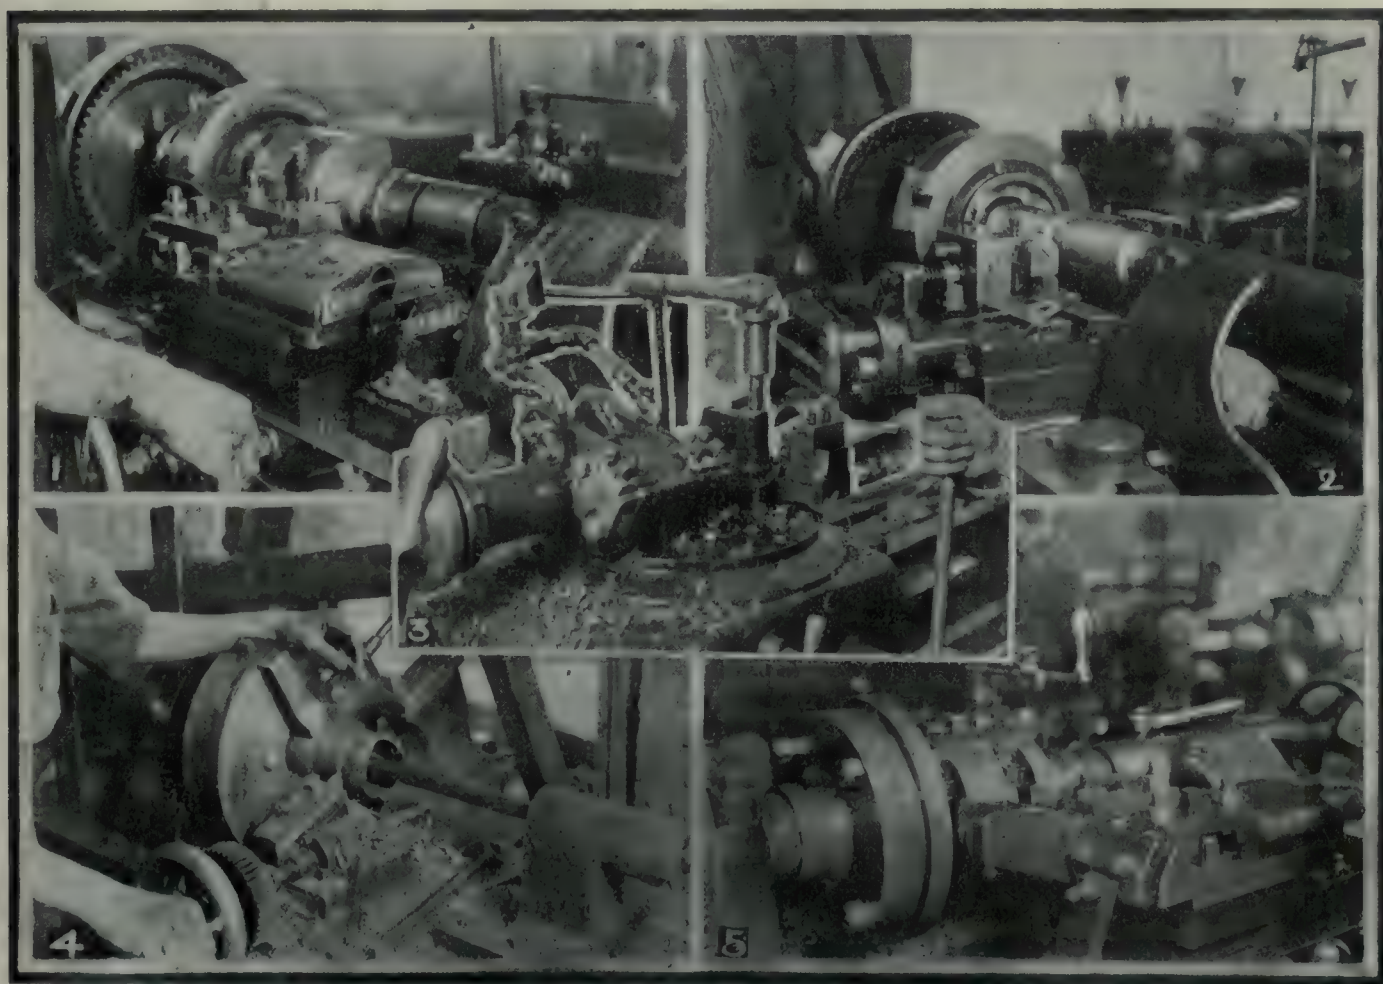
(1) A "MADE-IN-CANADA" WAVING ATTACHMENT HAVING A CAST IRON CAM ON THE FACE PLATE. NOTE FLAT SPRING TO KEEP ROLLER TOUCHING CAM. (2) BERTRAM WAVING ATTACHMENTS MOUNTED ON A MCGREGOR-GOURLAY (CANADA MACHINERY CORPORATION) STANDARD ENGINE LATHE. (3) ROUGH TURNING ON A JONES & LAMSON LATHE. (4) CUTTING-OFF OPEN END OF SHELL FORGINGS ON A HURLBUT-ROGERS PARTING MACHINE. (5) A "MADE-IN-CANADA" WAVING ATTACHMENT.
